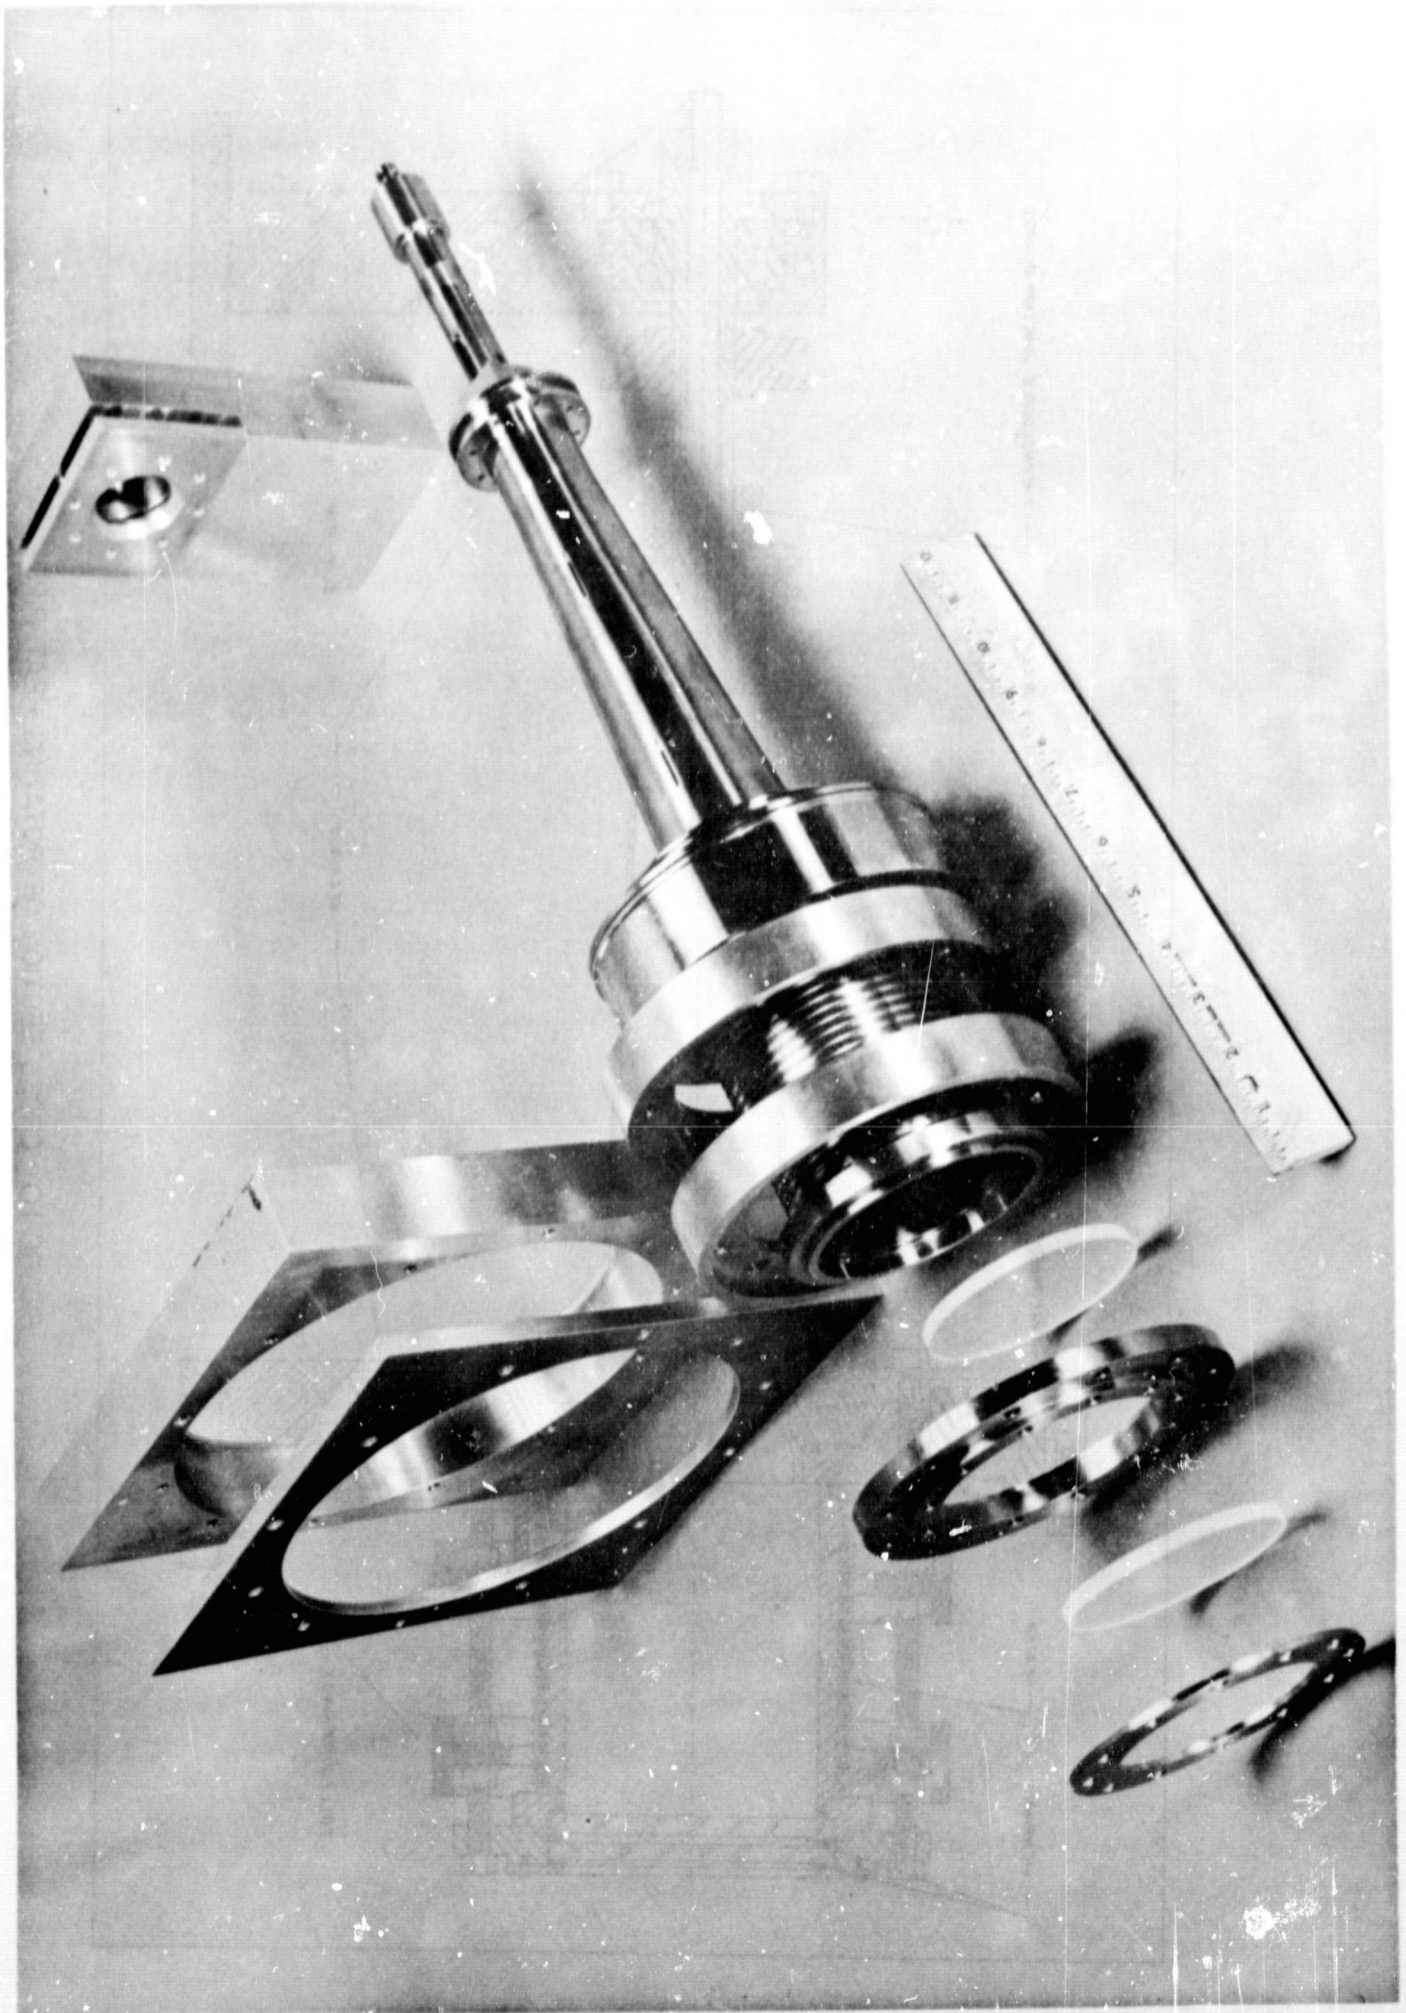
PHOTOGRAPH OF ROTATING HEAT PIPE COMPONENTS PRIOR TO ASSEMBLY
